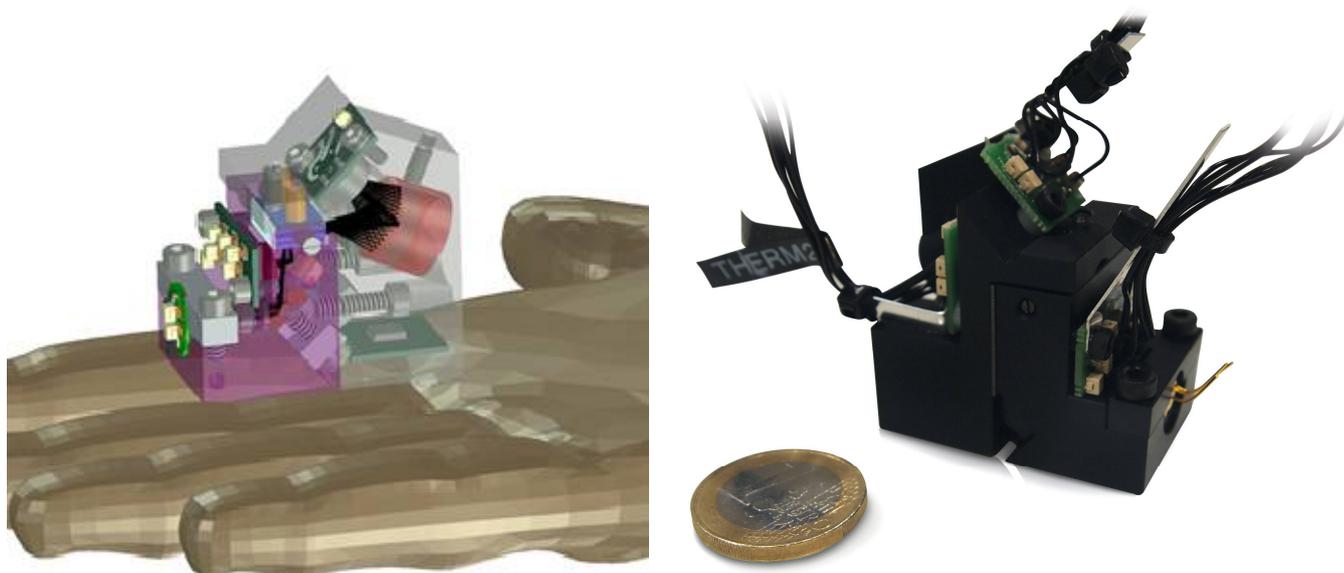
Methane sensor demonstrator; left) Optomechanical design of the sensor head “on palm”; right) Photo of the assembled demonstrator.
